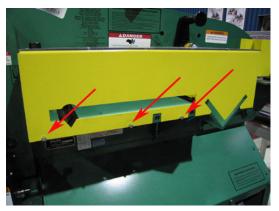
Drill and tap holes in the locations shown and use screws to secure the guard to the machine.
